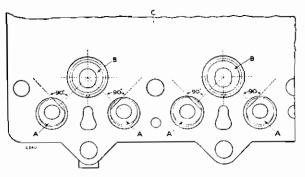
Correct position of push-rod tubes in relation to hot plugs
